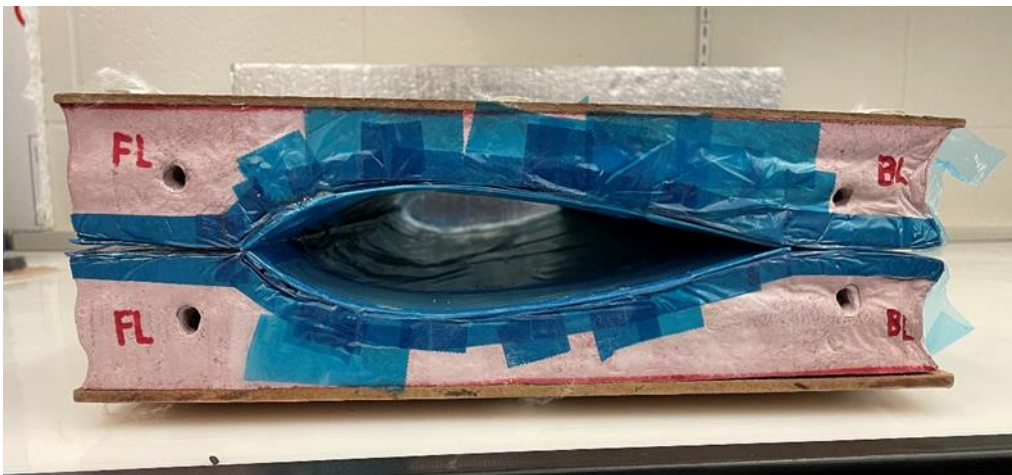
Airfoil Tool Top and Bottom Combined Shape
